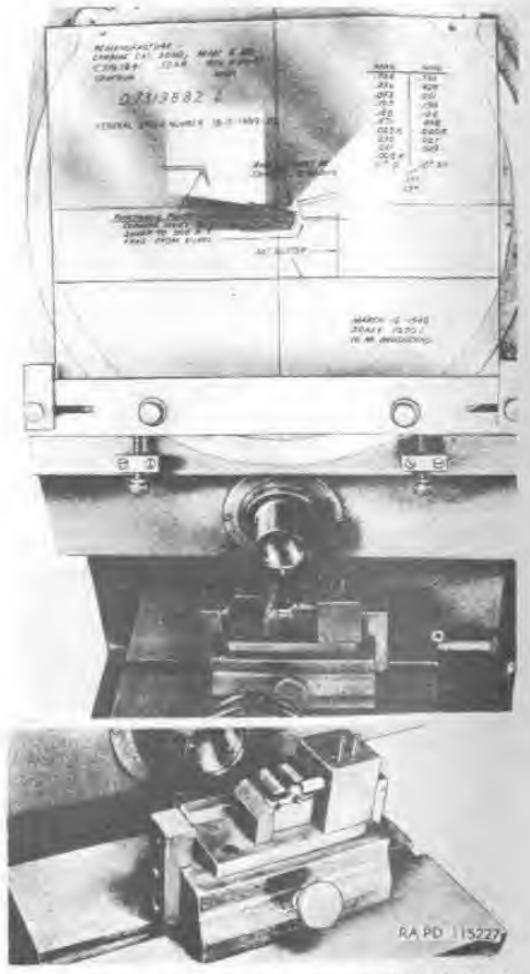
Reveen and fixture with scar-slide in position 1-to right.
